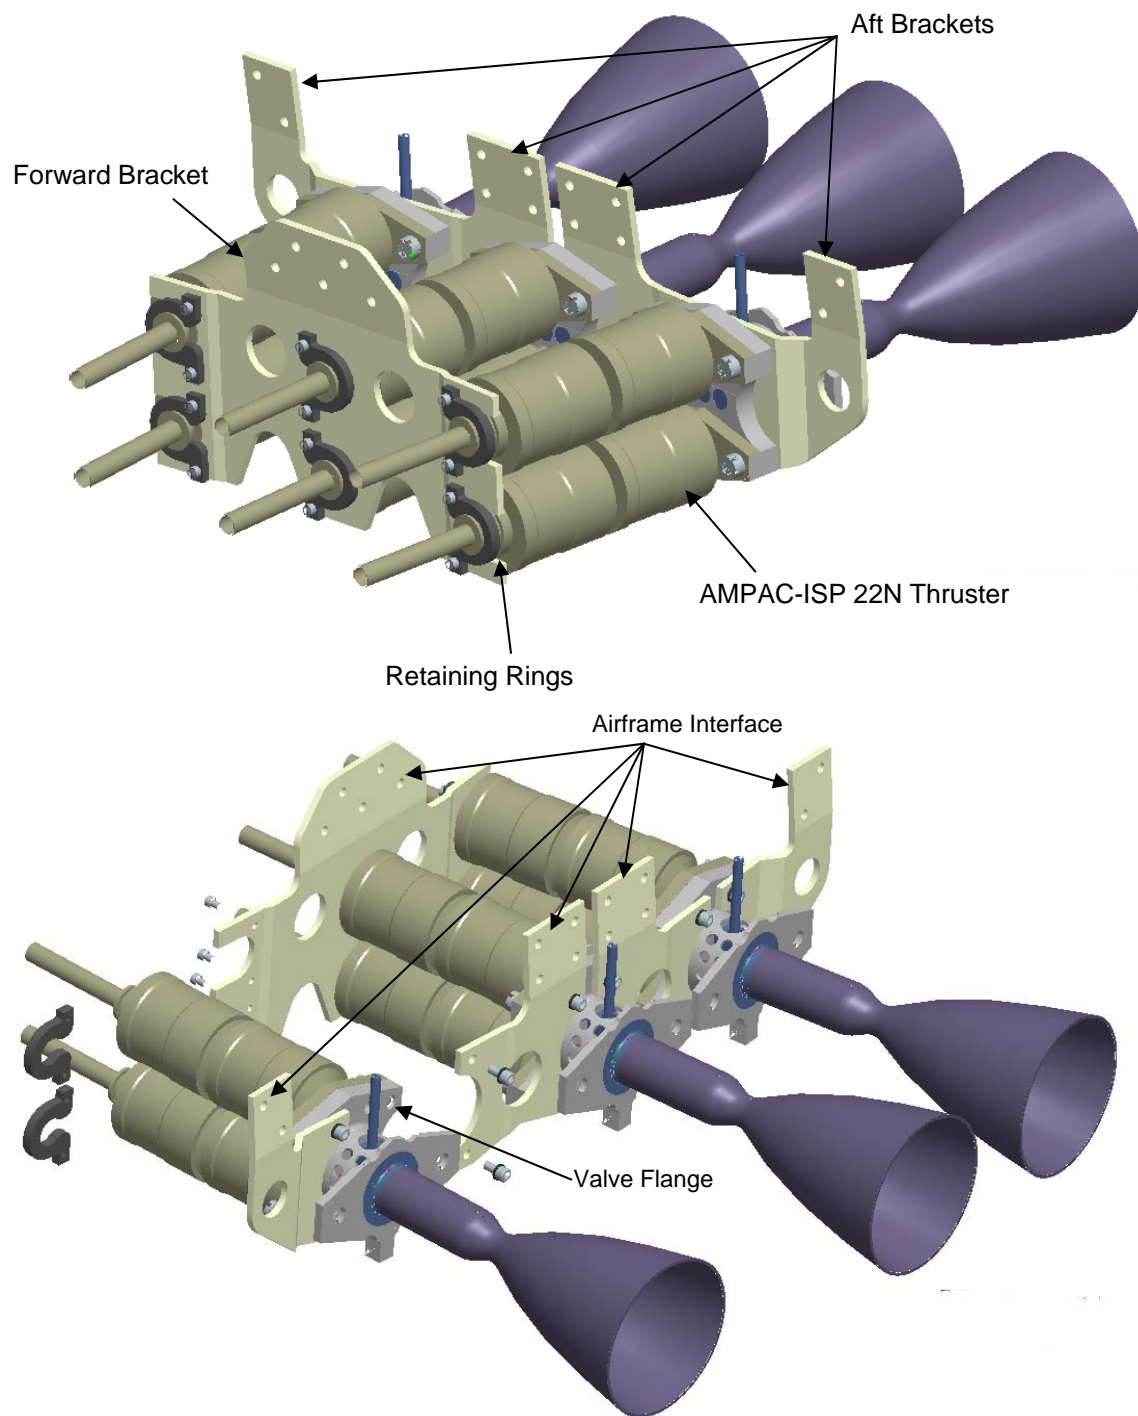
Triple 22N In-Line Thruster Mounting and Assembly
